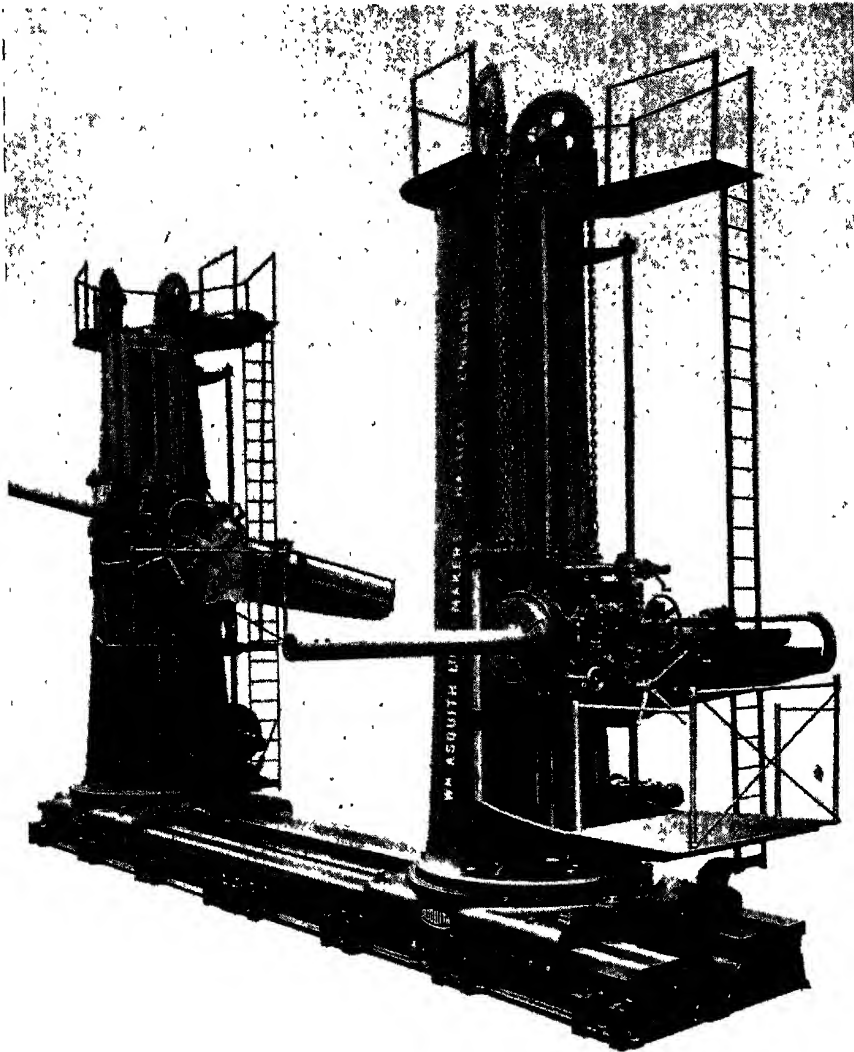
ASQUITH 7 IN. SPINDLE DRILLING AND BORING MACHINE BORING
